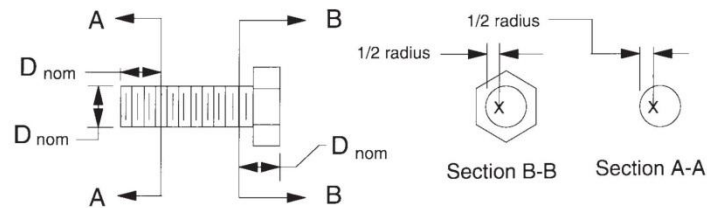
Location of Standard Round 2-in. Gage Length Tension Test Specimen When Turned from Large Size Bolt
